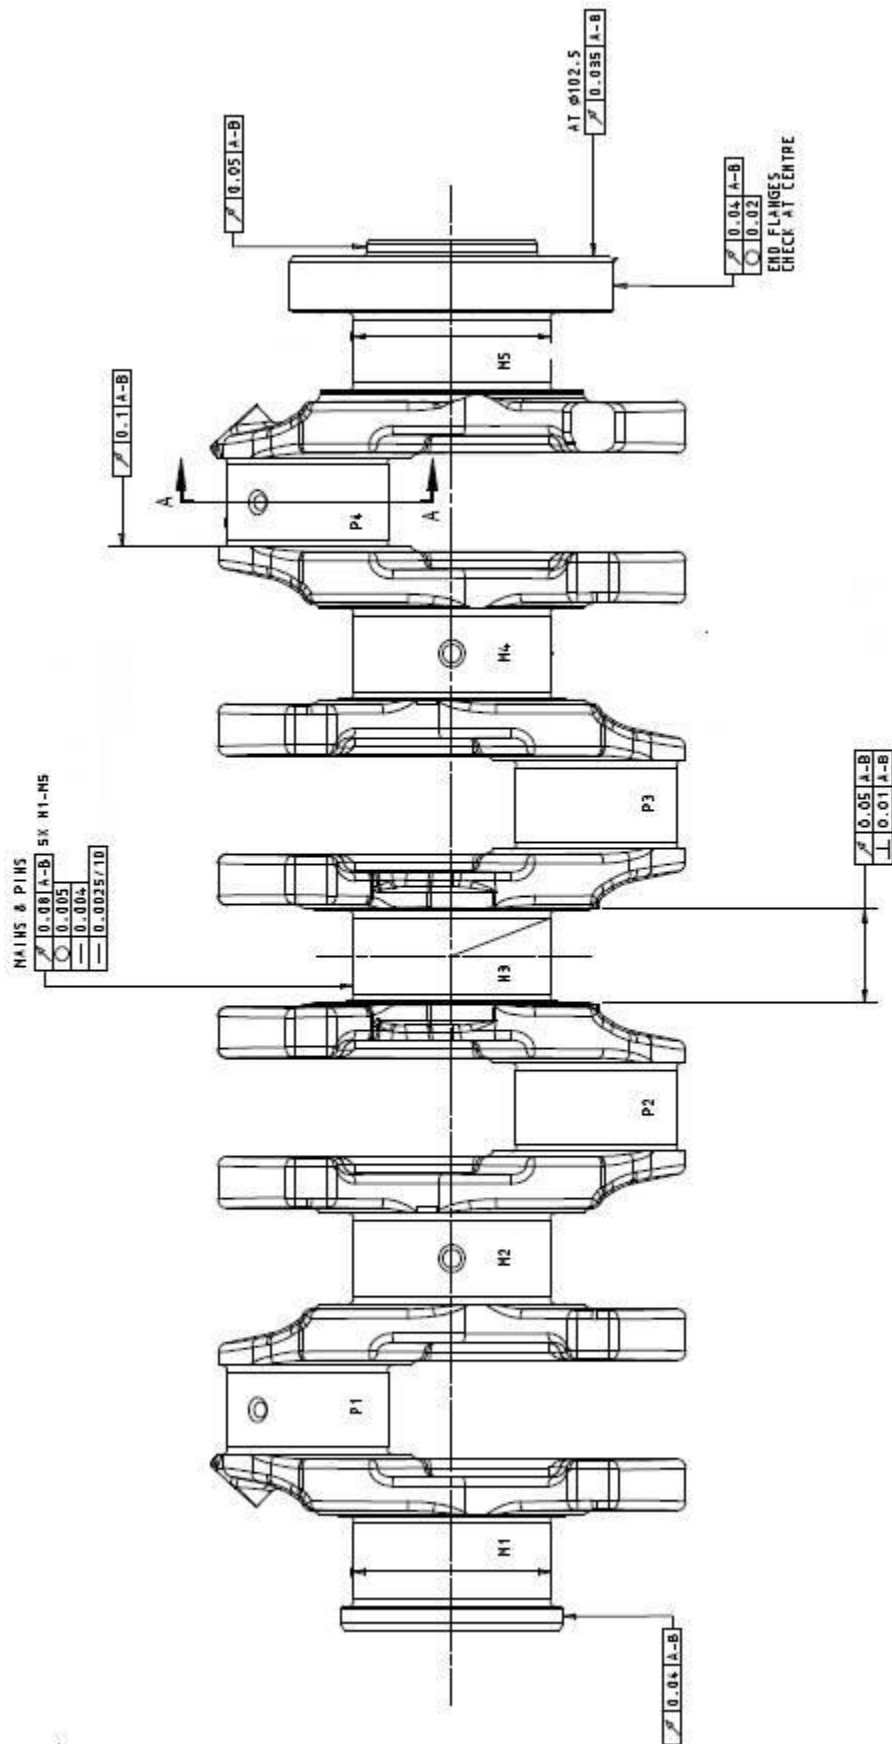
Technical drawing of the cast crankshaft (top view)
